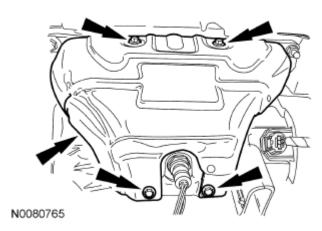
Locating Exhaust Manifold Heat Shield Bolts And Heat Shield Courtesy of FORD MOTOR CO.
